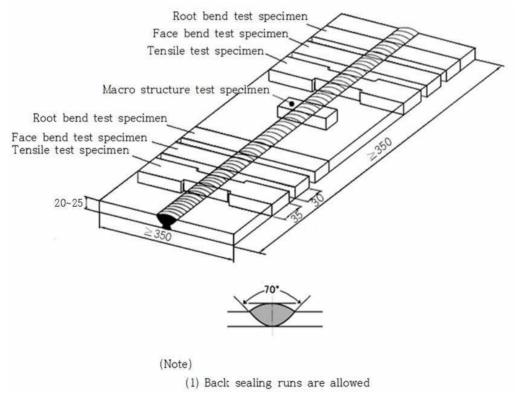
Butt Weld Test Assembly for Aluminium Alloys (A thickness of 20 to 25, unit: mm)
